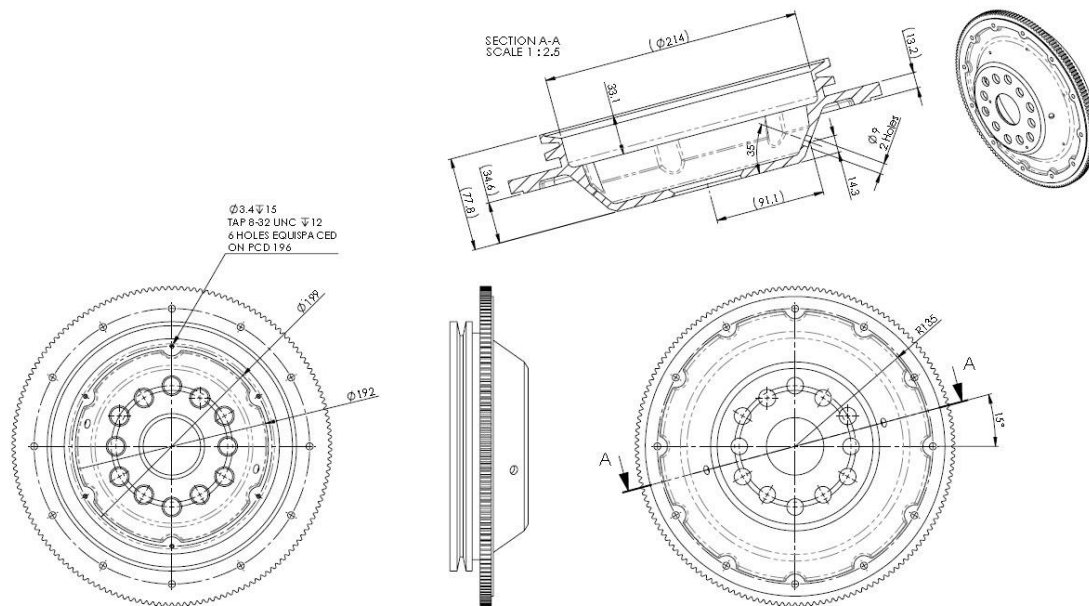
Lycoming Ring Gear Machining Dimensions.
